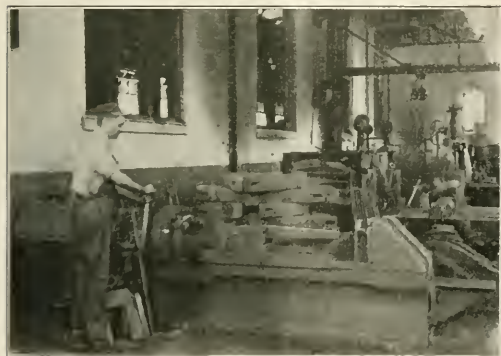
R. D. Wood Hydraulic Machine Used for Stripping Springs
